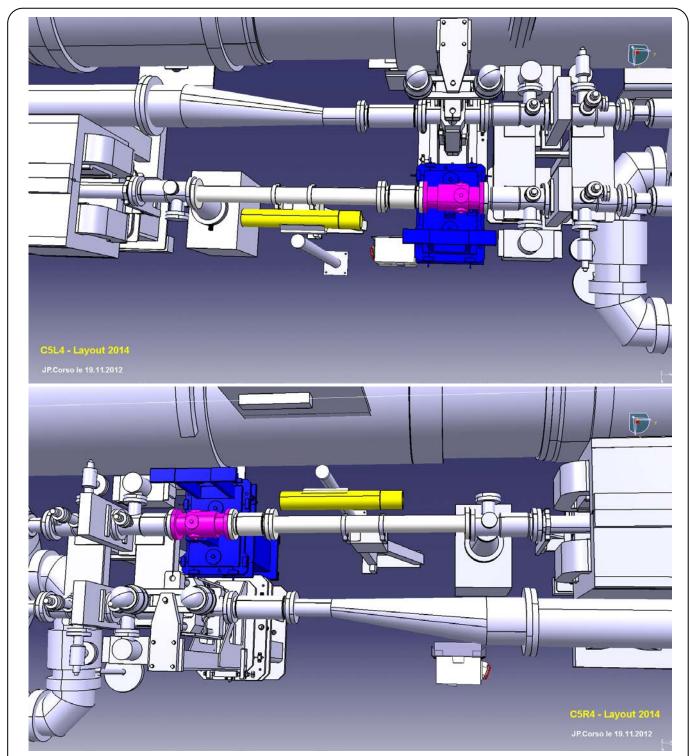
The proposed modification of the vacuum sectors in C5L4 (beam 1, upper drawing) and C5R4 (beam 2, bottom drawing). (Courtesy of JP Corso).
